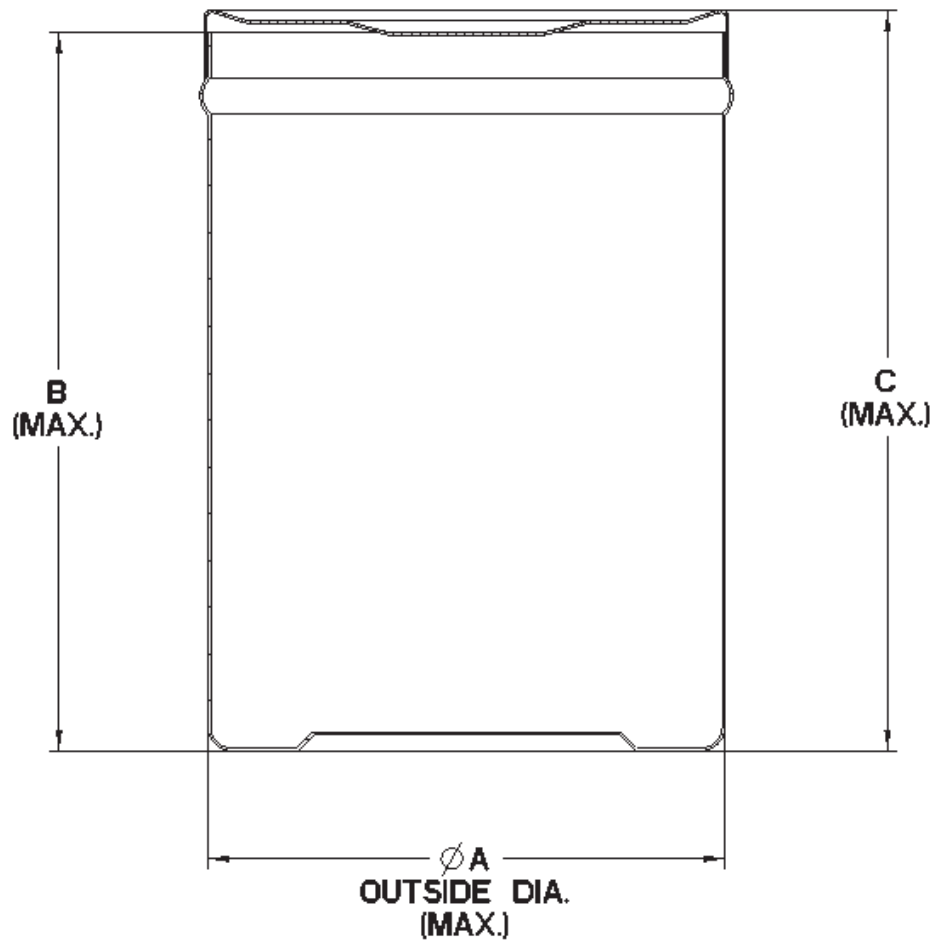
Inner Container Dimensions for Table 6.8-1
